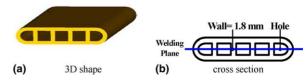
Model of condenser tube: (a) 3D shape and (b) cross-section.
